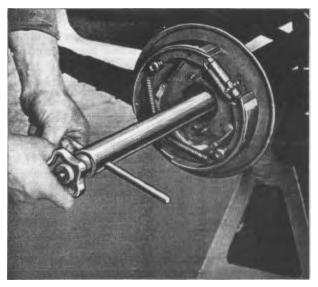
Removing Broken Axle Shaft—HM-540 Broken Axle Shaft Remover
